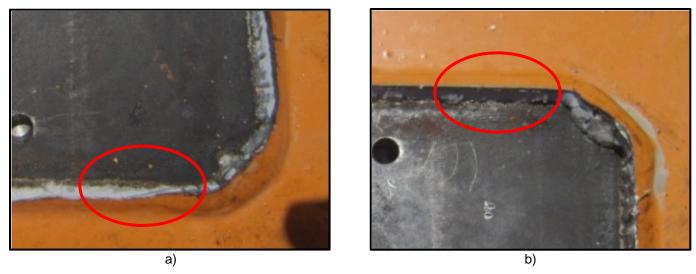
(a) fractured weld, (b) area of weld showing lack of fusion
